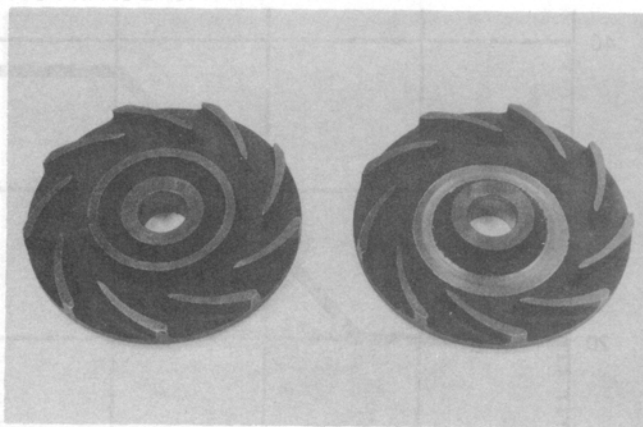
Remove dust collar on water pump impeller to increase coolant flow.
